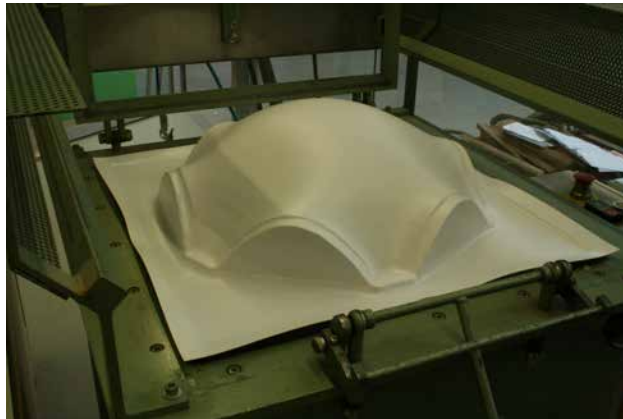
Manufacture of shell model using the vacuum forming machine.
